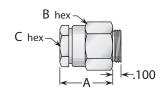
(Clamp type for flexible cable or solder-clamp for semi-rigid cable)
